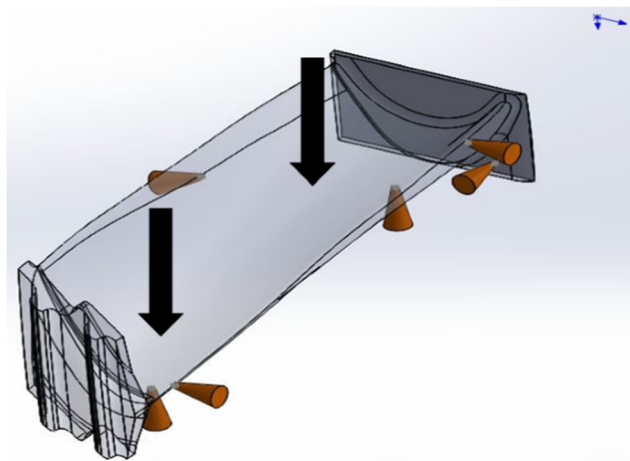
Locators’ placement and clamping force direction in the turbine blade
